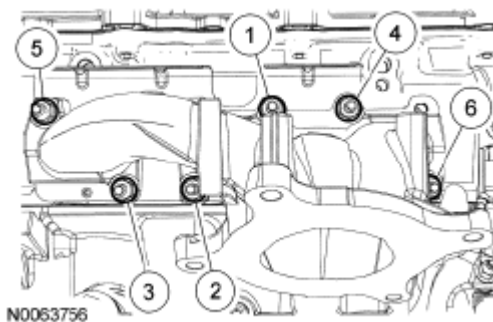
Identifying LH Exhaust Manifold Studs Tightening Sequence
